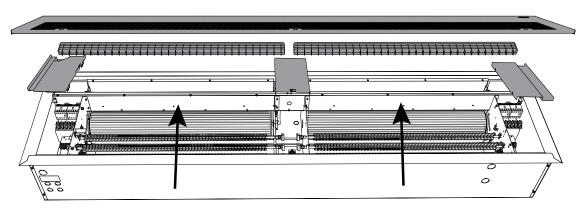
In order to mount the brackets, remove the service hatch, outlet grille and covering plates.
